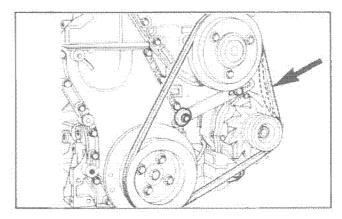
Alternator drive belt tension - 807/829/841 engines
